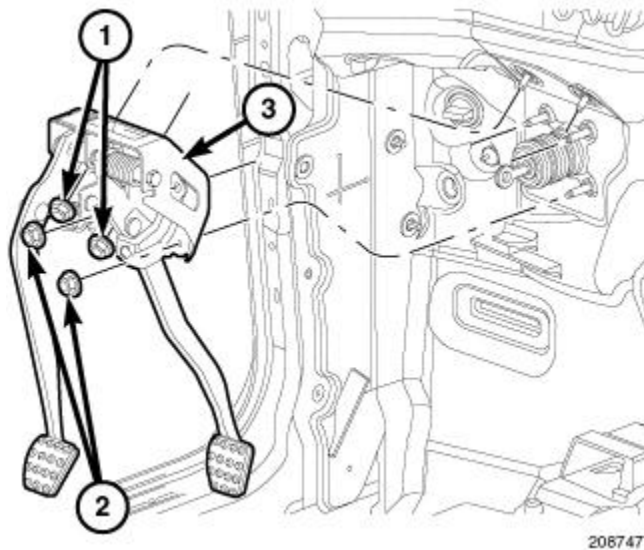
Remove/Install Clutch/Brake Pedal Assembly & Mounting Nuts
